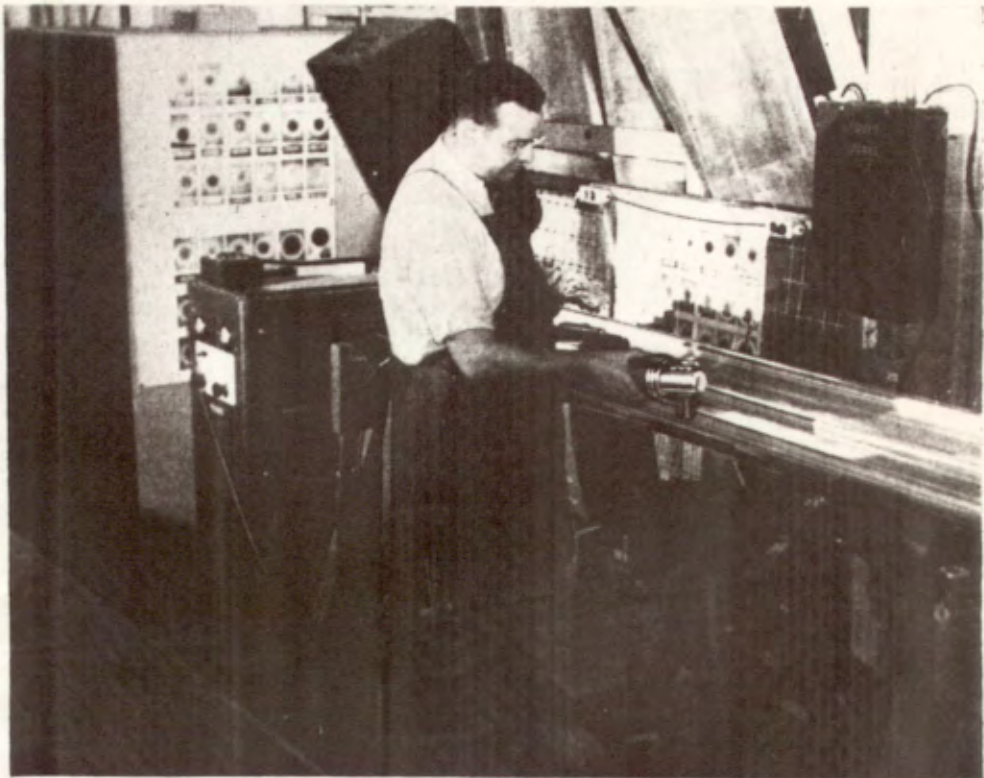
Radiographing Spot-Welded Aircraft Tail-Boom Panels in Production Welding Department, with Picker 50-kvp Industrial X-ray Unit. (Courtesy Picker X-ray Corp., New York, N. Y.)
